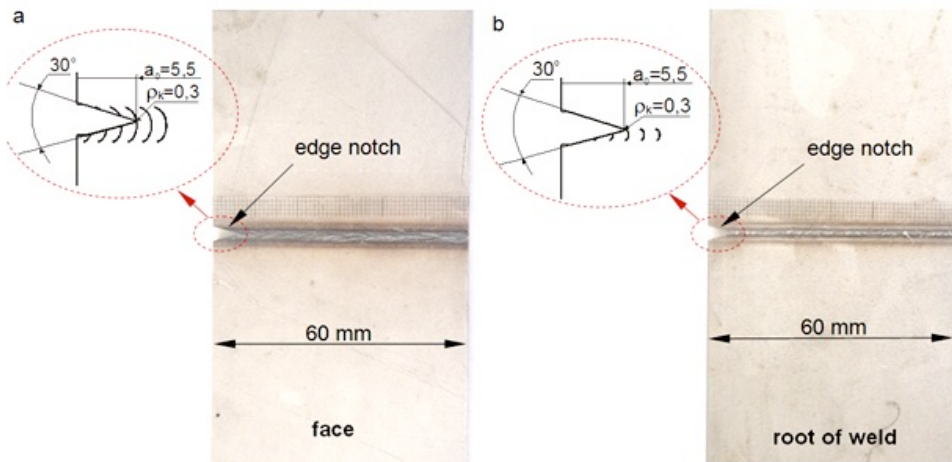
A view of the specimen with an edge notch welded with a laser from the face side (a) and root of weld side (b)
